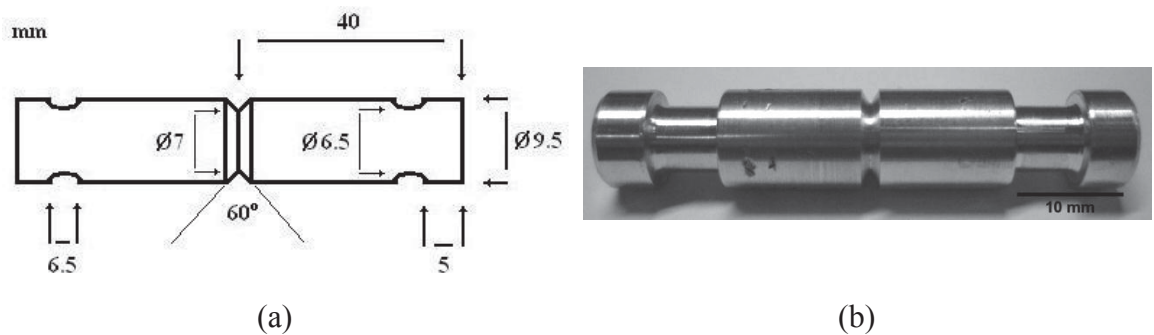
The circumferential notched tension test (a) specimen configuration and (b) machined specimen.
